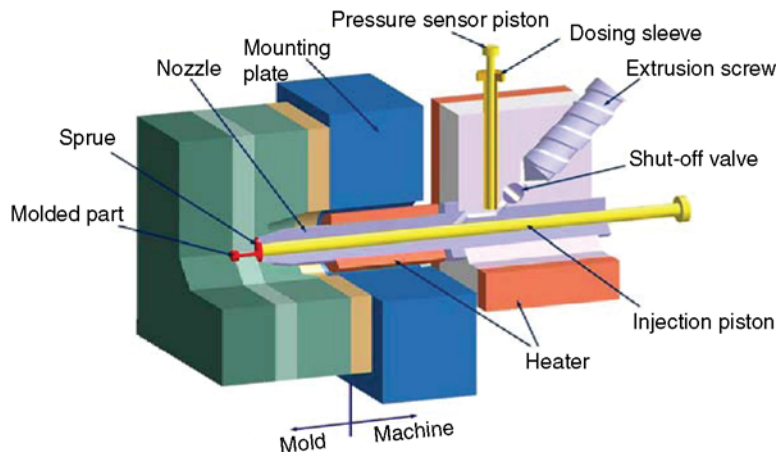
Injection unit of a micro-injection molding machine [4].
